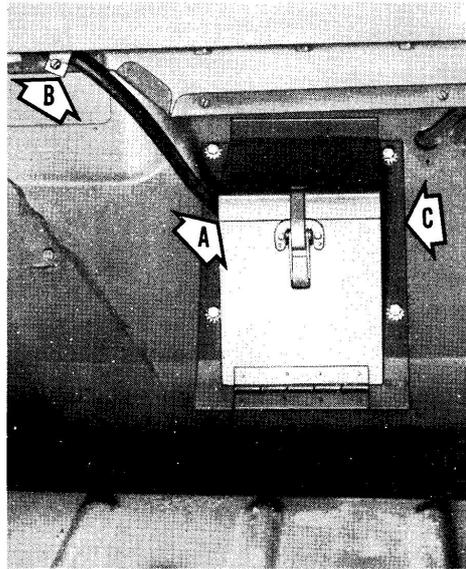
(A) Heater power lead routed. (B) Heater Power lead clamped to lower battery compartment cover. (C) Upper heater shield bolted in place.
